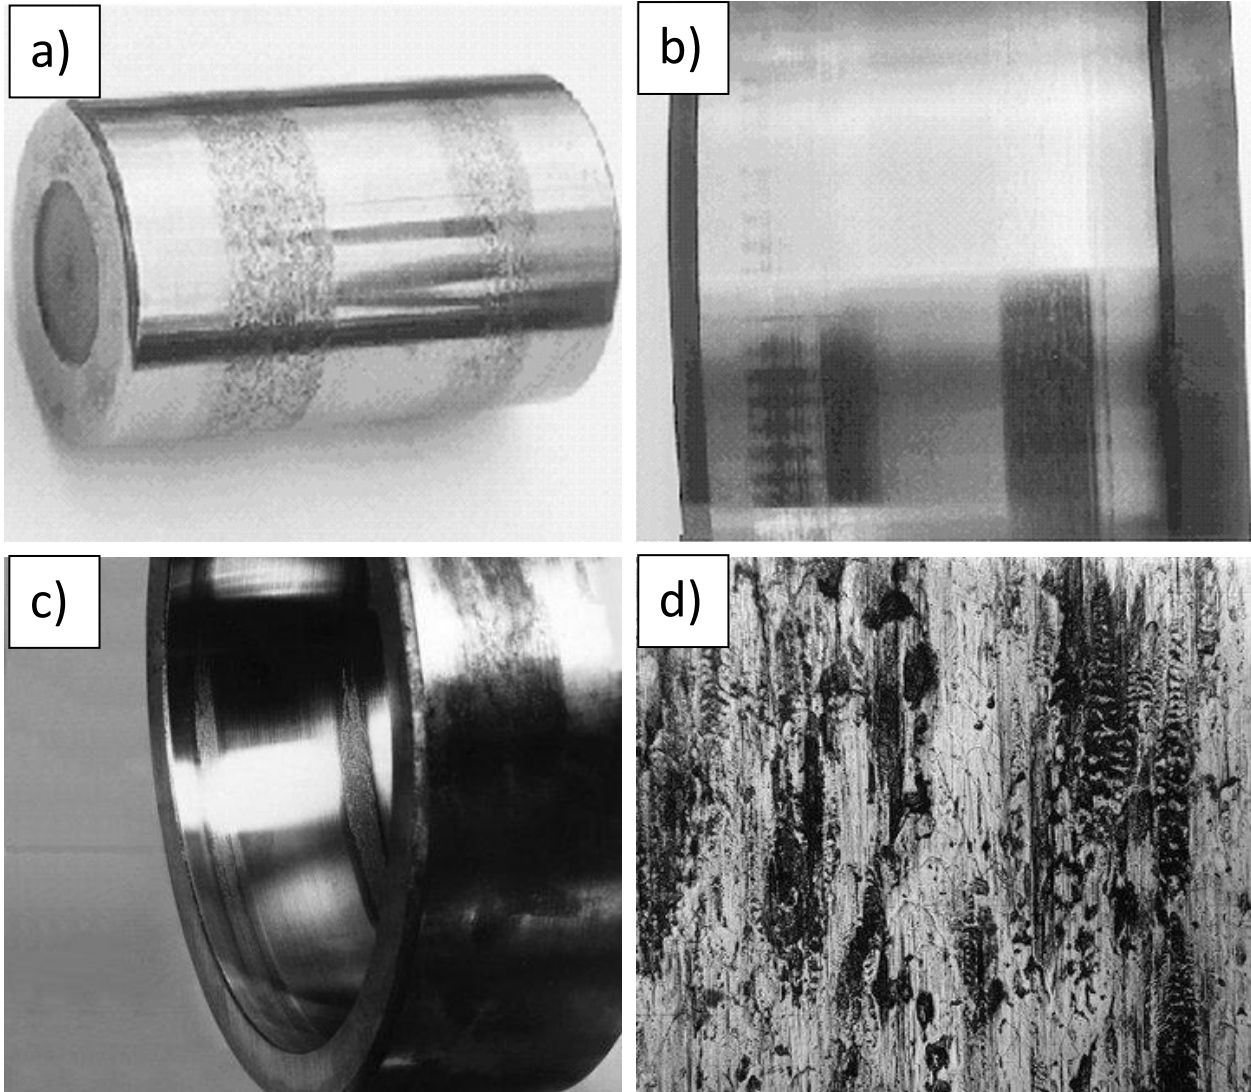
Examples of smearing damage in rolling bearings: a) smeared roller from a cylindrical roller bearing (CRB) [6]; b) smearing damage on the inner ring of a CRB [6]; c) Smearing damage on both outer raceways of a spherical roller bearing (SRB) d) Smeared area on a spherical roller from an SRB ([www.skf.com](http://www.skf.com))
